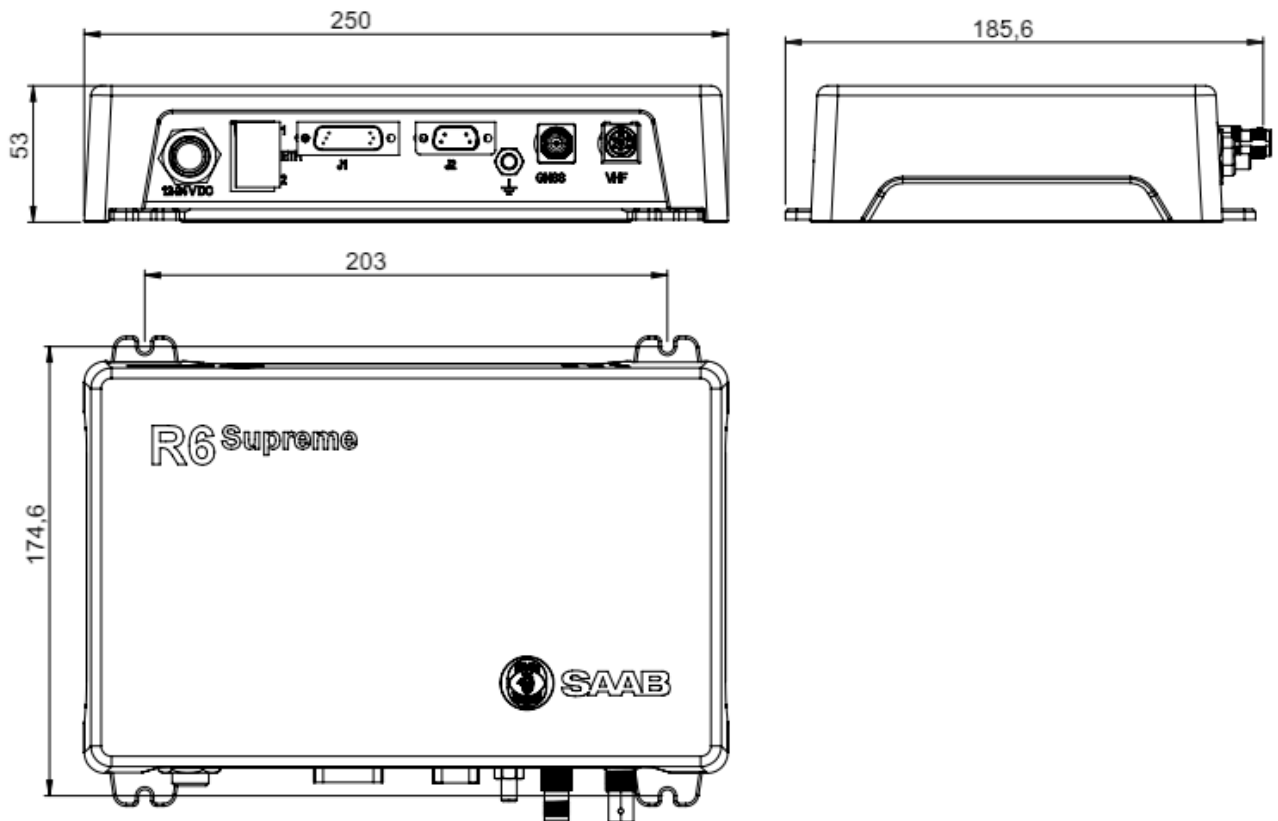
R6 SUPREME Transponder, Dimensions [mm]
